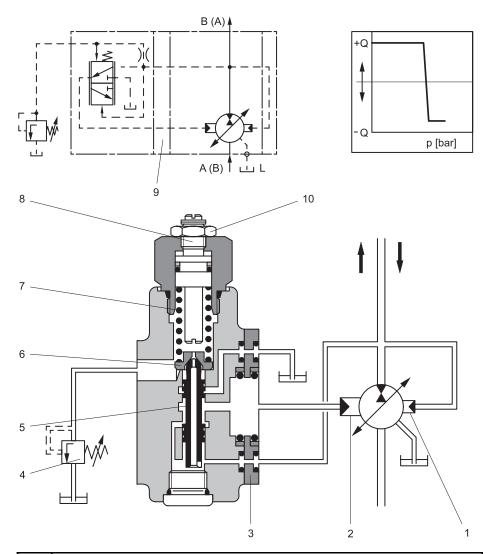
Hydraulically Driven Remote Pressure Compensator, H1
